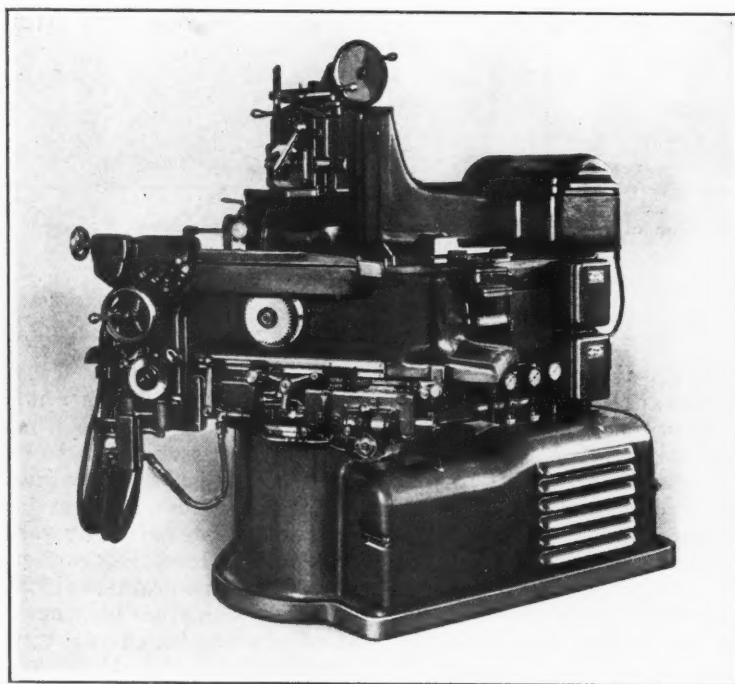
Pratt & Whitney Hydraulic Gear Grinder for Spur and Helical Gears up to 10 Inches Pitch Diameter
